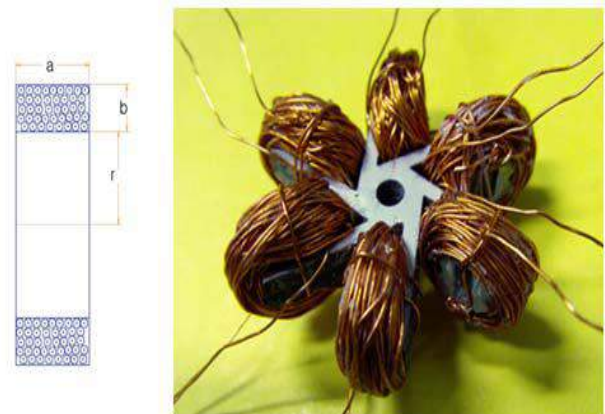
Left – dimension of short cross-wound coil. Right – real winding of coil
